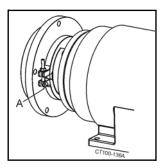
Clamp Impeller/Backplate to Motor Adapter
